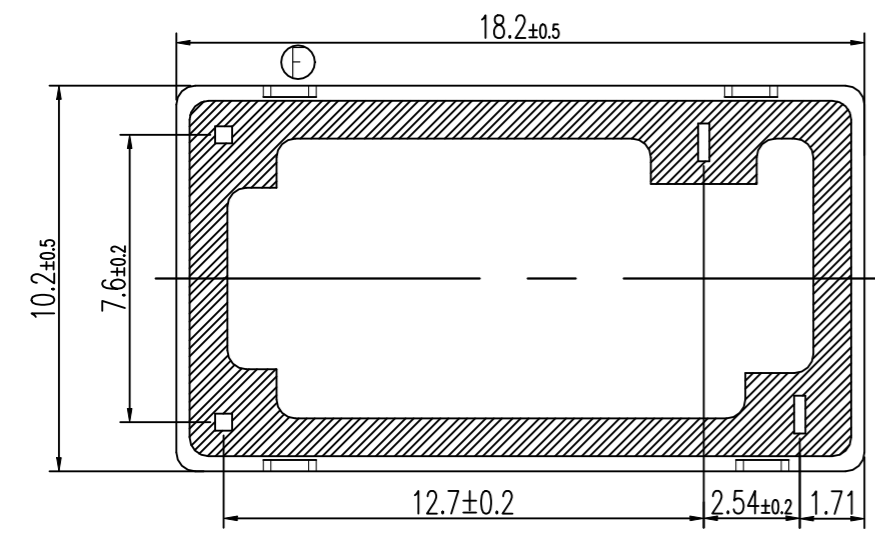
FIGURE FOR PRINTED CIRCUIT BOARD PROCESSING (BOTTOM VIEW)
